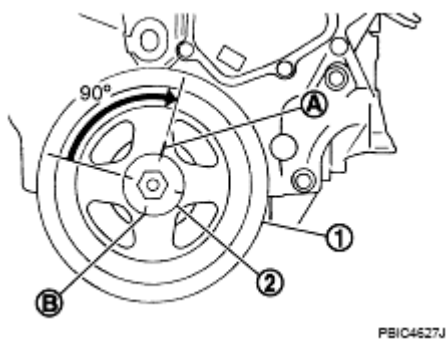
Identifying Crankshaft Pulley Bolt Tightening Angle
